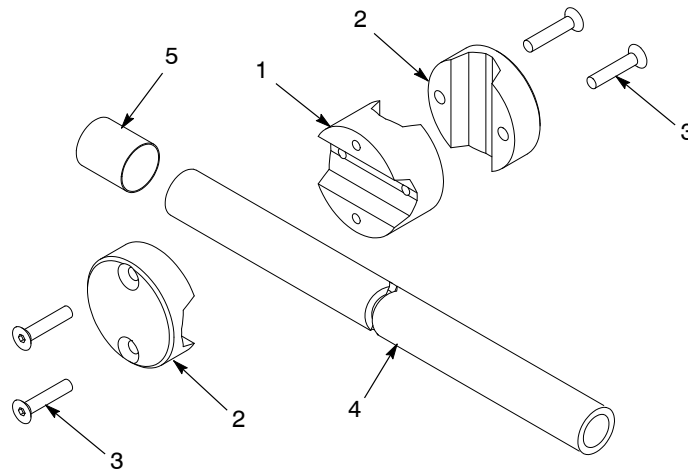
Universal Bar Mount Kit for Bar-Mount Guns
